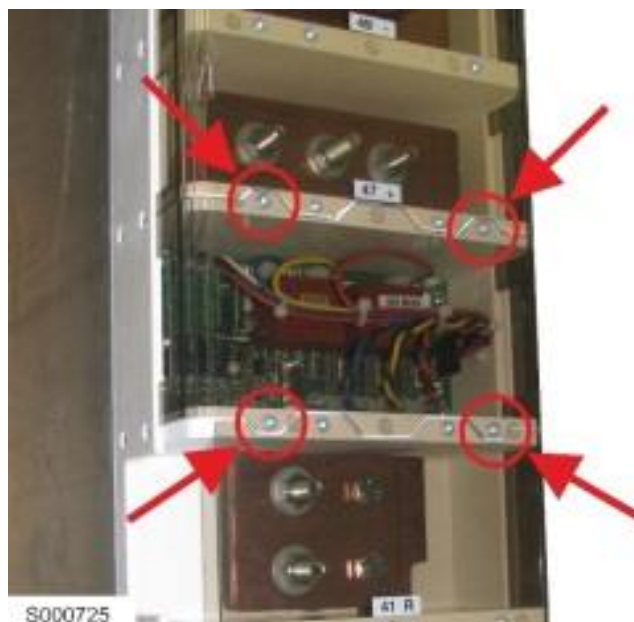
Accessing the ES840 board in the AC/DC UNIT 1050
